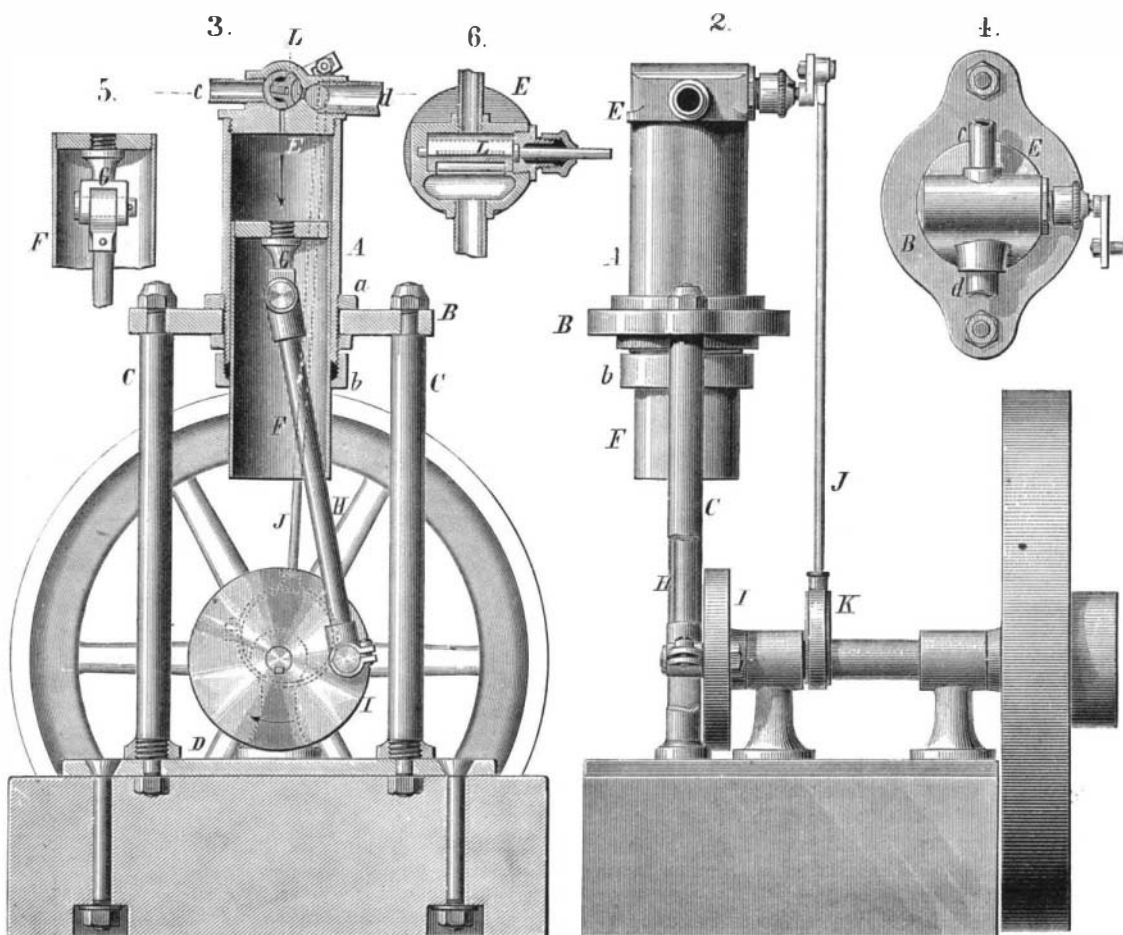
SIMPLE SINGLE-ACTING STEAM ENGINE.
